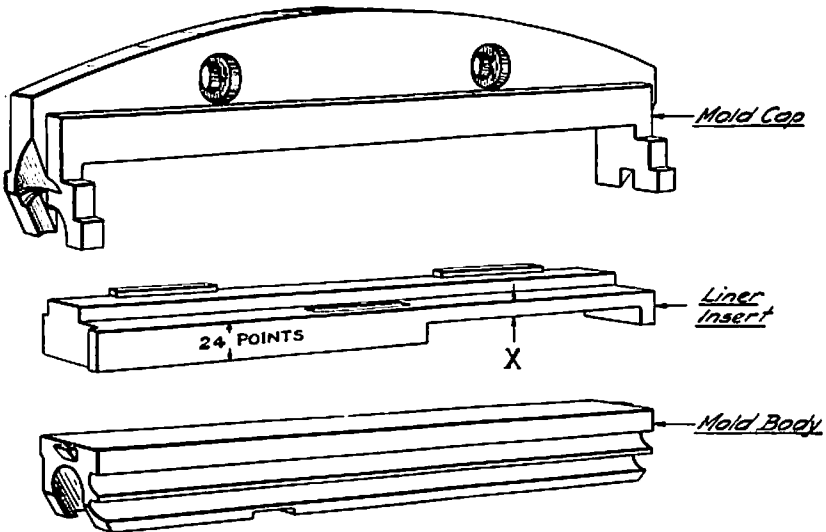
Liner Insert Mold for Six-Mold Disk. Inserts are made for casting solid slugs from 5 to 14 points and recessed slugs from 10 to 14 points in any length up to 30 cms. The liner inserts are interchangeable and are removed simply by loosening the mold screws sufficiently to raise the mold cap about $1/16''$. The lip *X* on the insert is sufficiently thick for casting overhanging characters up to 24 points in height.
